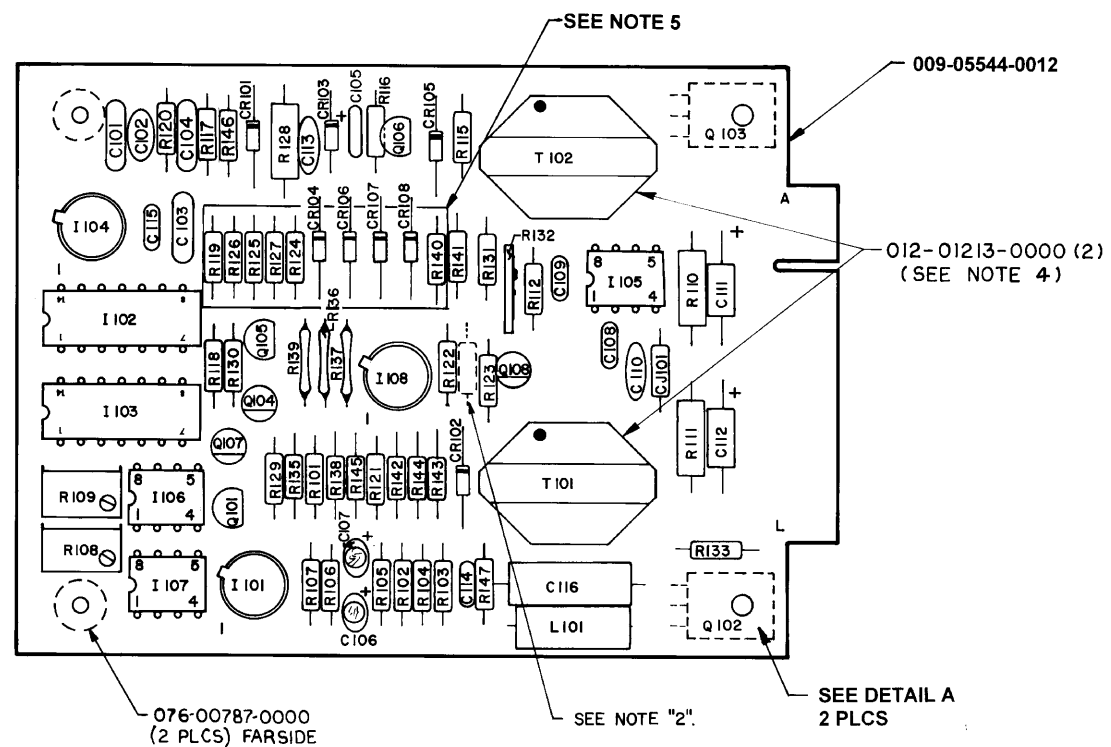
A KA 57 FINAL ASSEMBLY DRAWING
